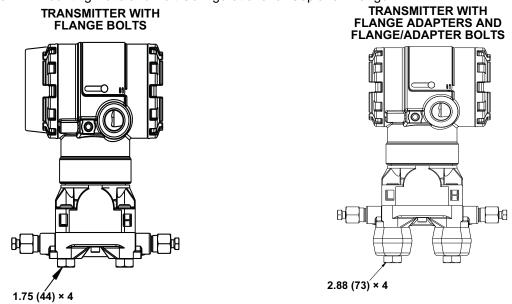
Mounting Bolts and Bolt Configurations for Coplanar Flange
